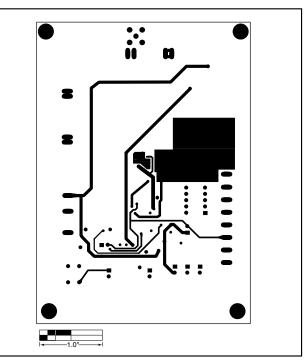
MAX1711 Voltage Positioning EV Kit PC Board Layout—Solder Side
